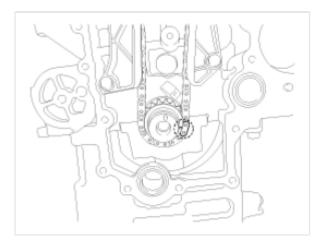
Identifying Timing Marks On CVVT Sprockets Courtesy of HYUNDAI MOTOR AMERICA
